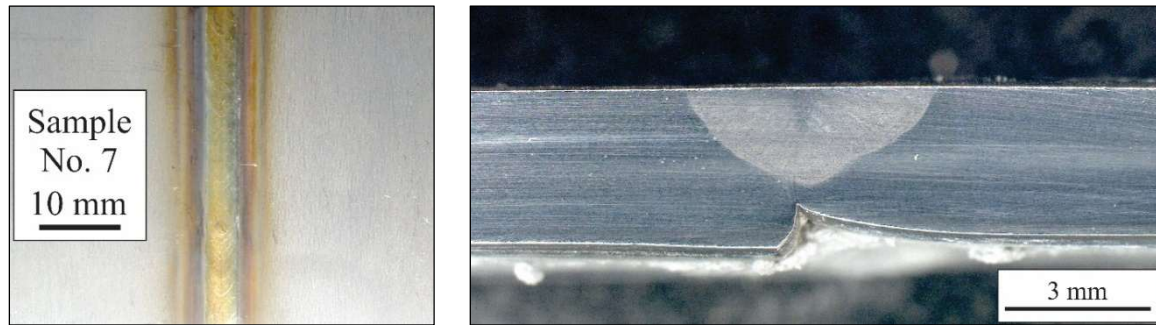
Specimen N° 7 - TAG, 100 A, no filler material
